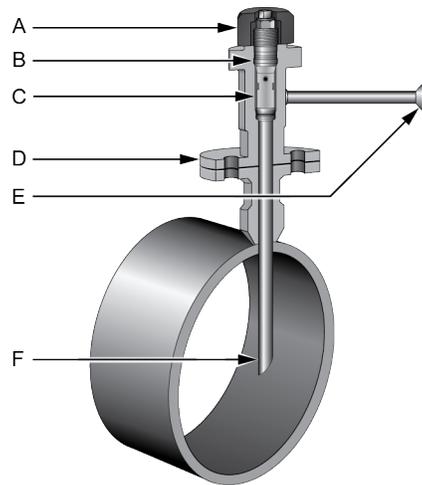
shows the parts for the Roxar Chemical Injection and Sampling System in a tee-type mechanical flanged access fitting.
